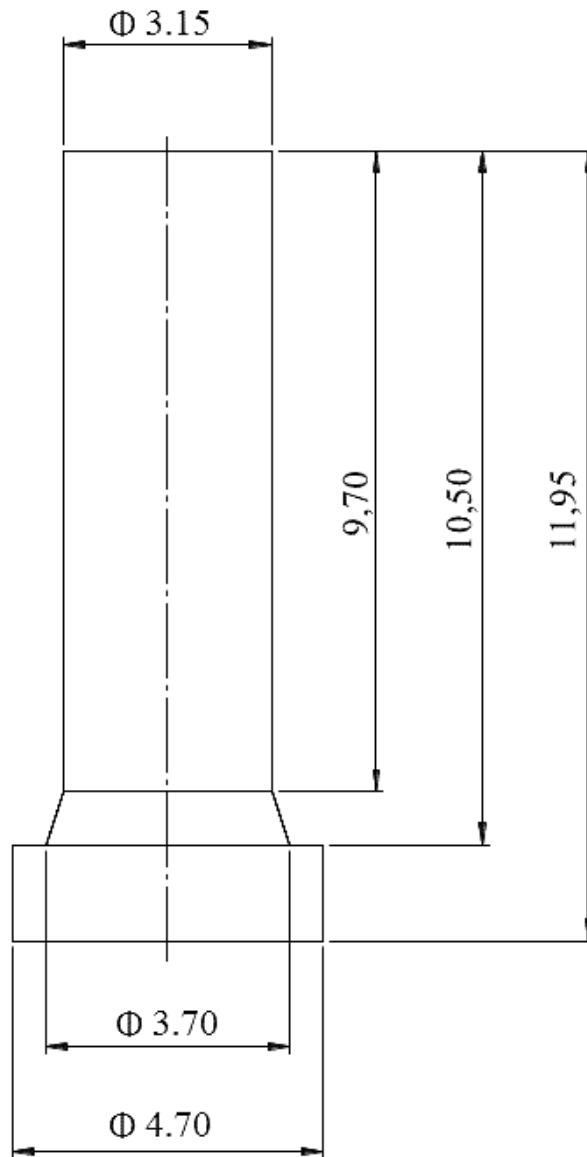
Details of workpiece used in the biocorrosion tests (Geometry 1).
